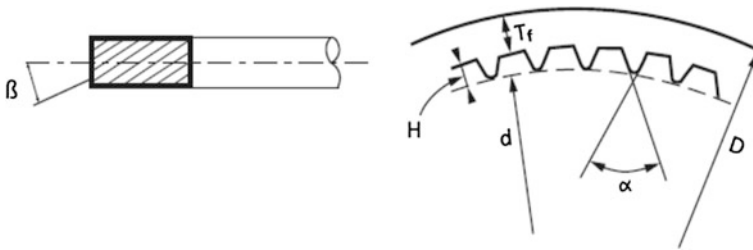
The measurements involved in the technical specifications of grooved tubes (KME)
